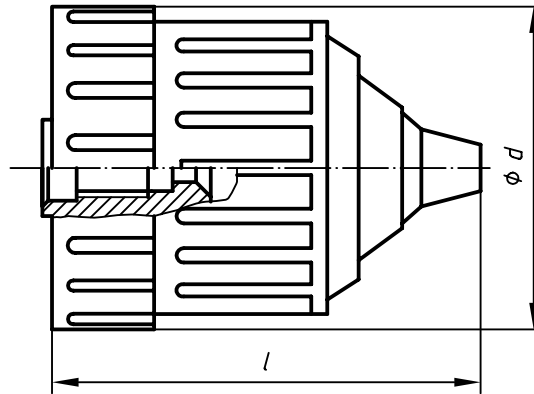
Three-jaw drill chuck — Internal thread mount type
